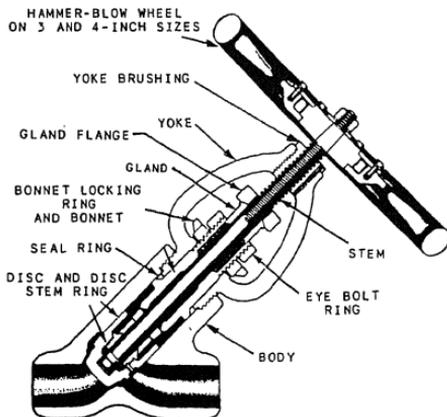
1500-pound pressure seal bonnet globe valve.
